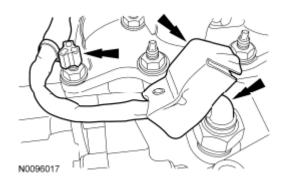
Locating Block Heater Shield, Electrical Connector And Wiring Harness Retainer Courtesy of FORD MOTOR CO.
